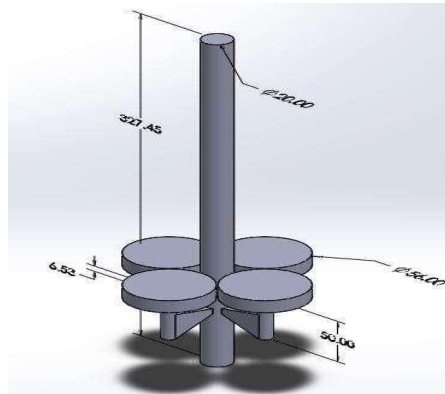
Design of Piston Rod along with Dimensions (Isometric View)
